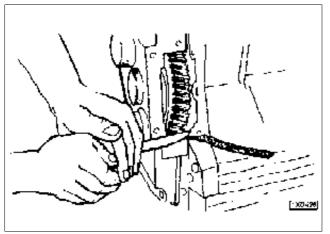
Remove excess gasket from the face used to fix external applications;
